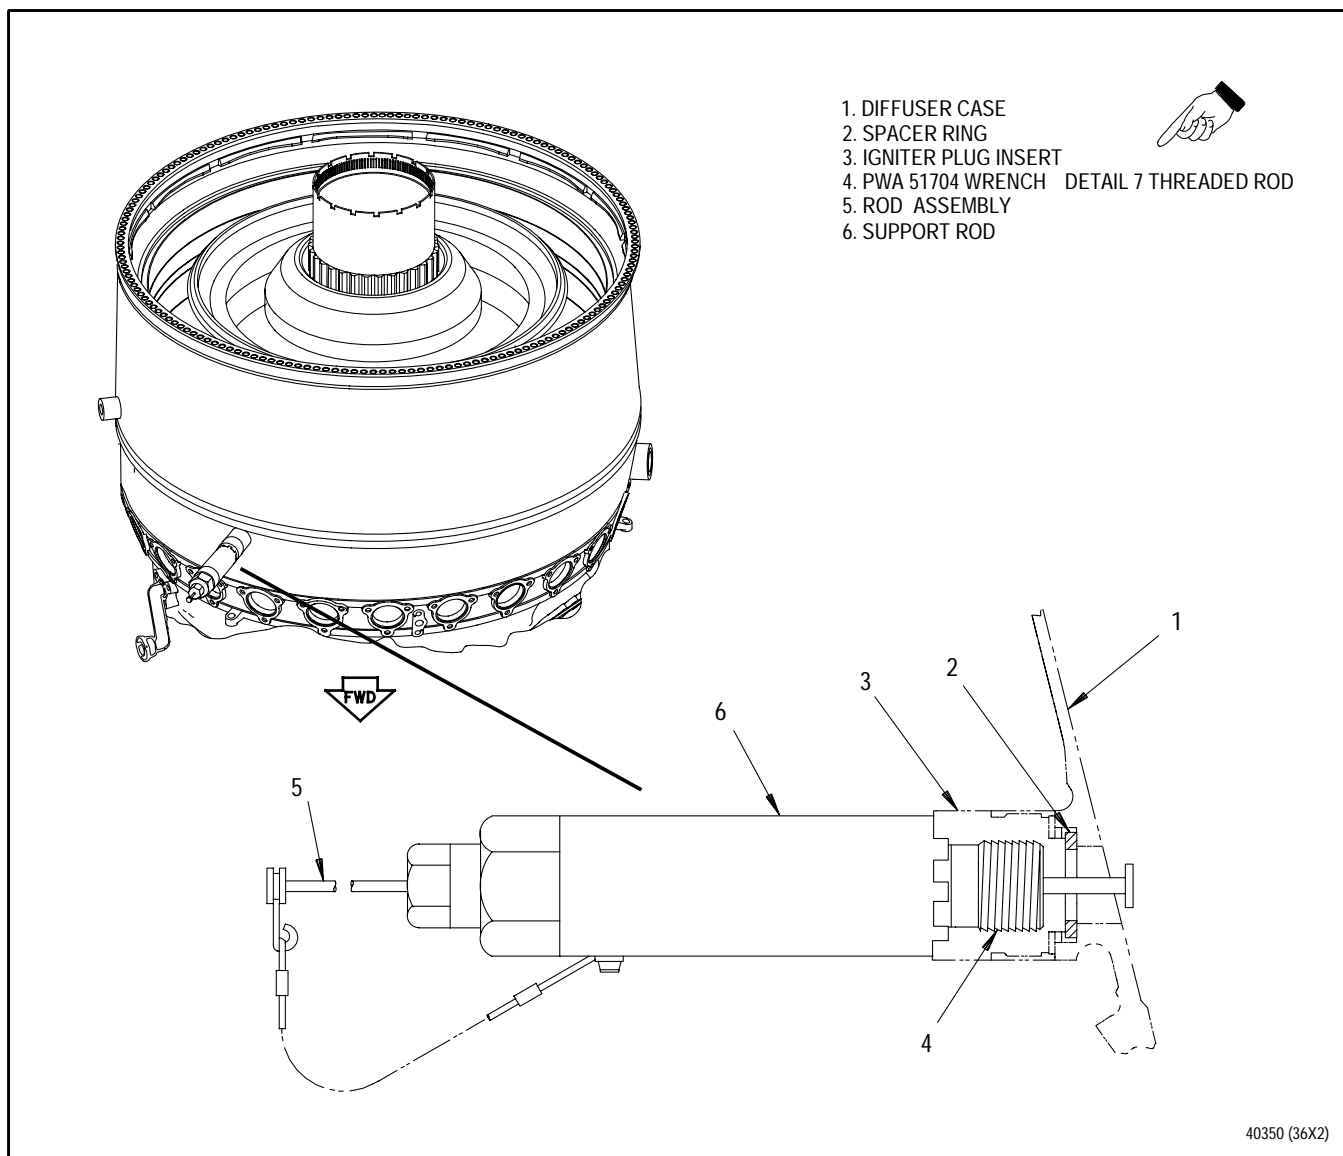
Igniter Plug Insert and Spacer Ring - Removal With PWA 51704 Wrench
